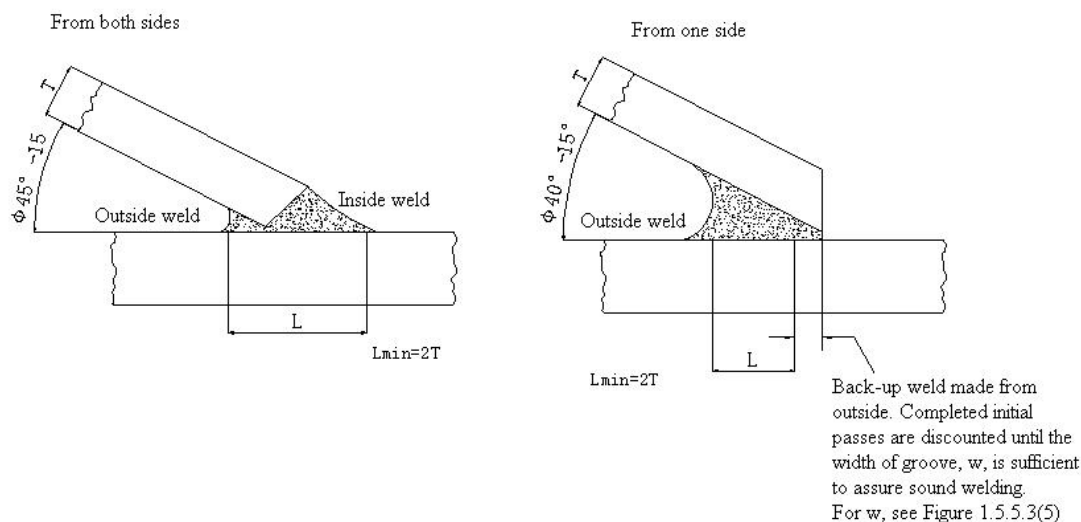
(6) Weld Location 5
